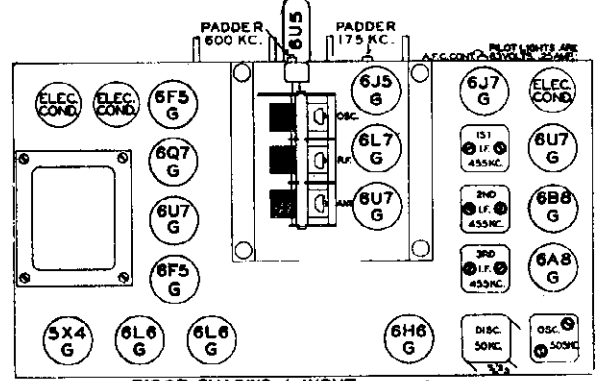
B CHASSIS LAYOUT (TOP VIEW)
